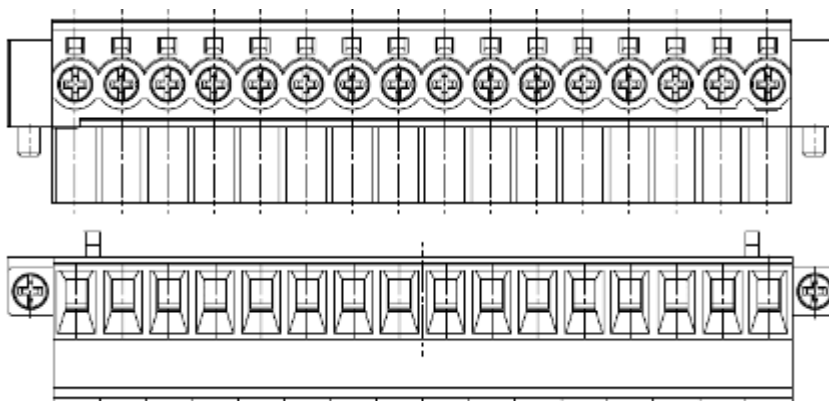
16-pin process terminal (type 180° for cabinet flush mounting)
